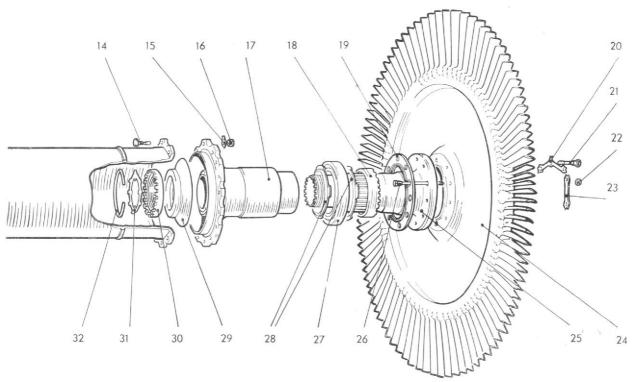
Exploded view of main shaft assembly as fitted to Ghost 48 Mk. 1, and 48 Mk. 2. (In a 53 Mk. 1, a balancing ring is fitted to the rear face of the extension shaft flange.)
